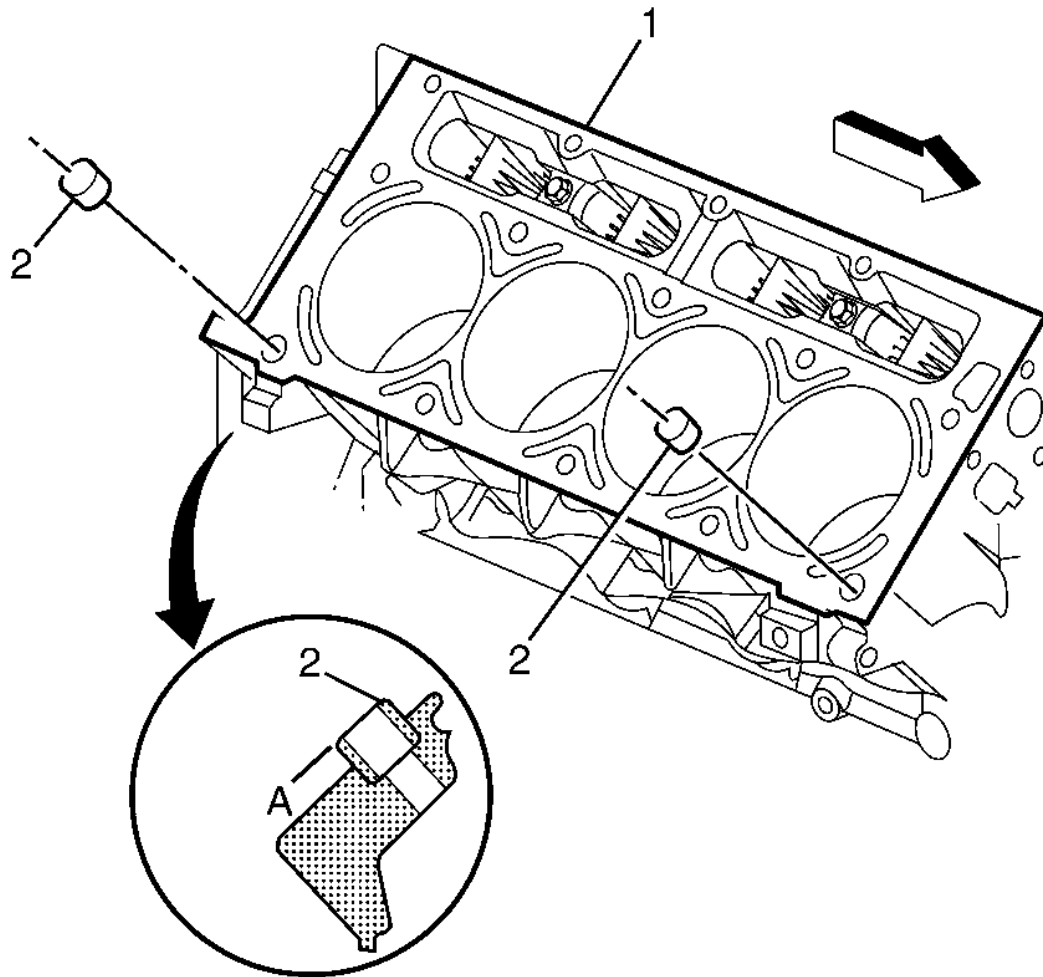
Identifying Cylinder Block & Locating Sleeves (Right Side)
